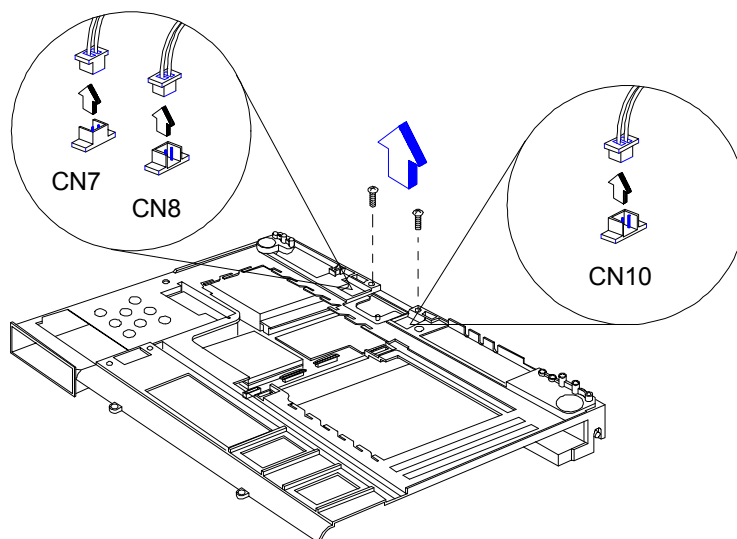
Unplugging the LCD Cover Switch and Speaker Cables
